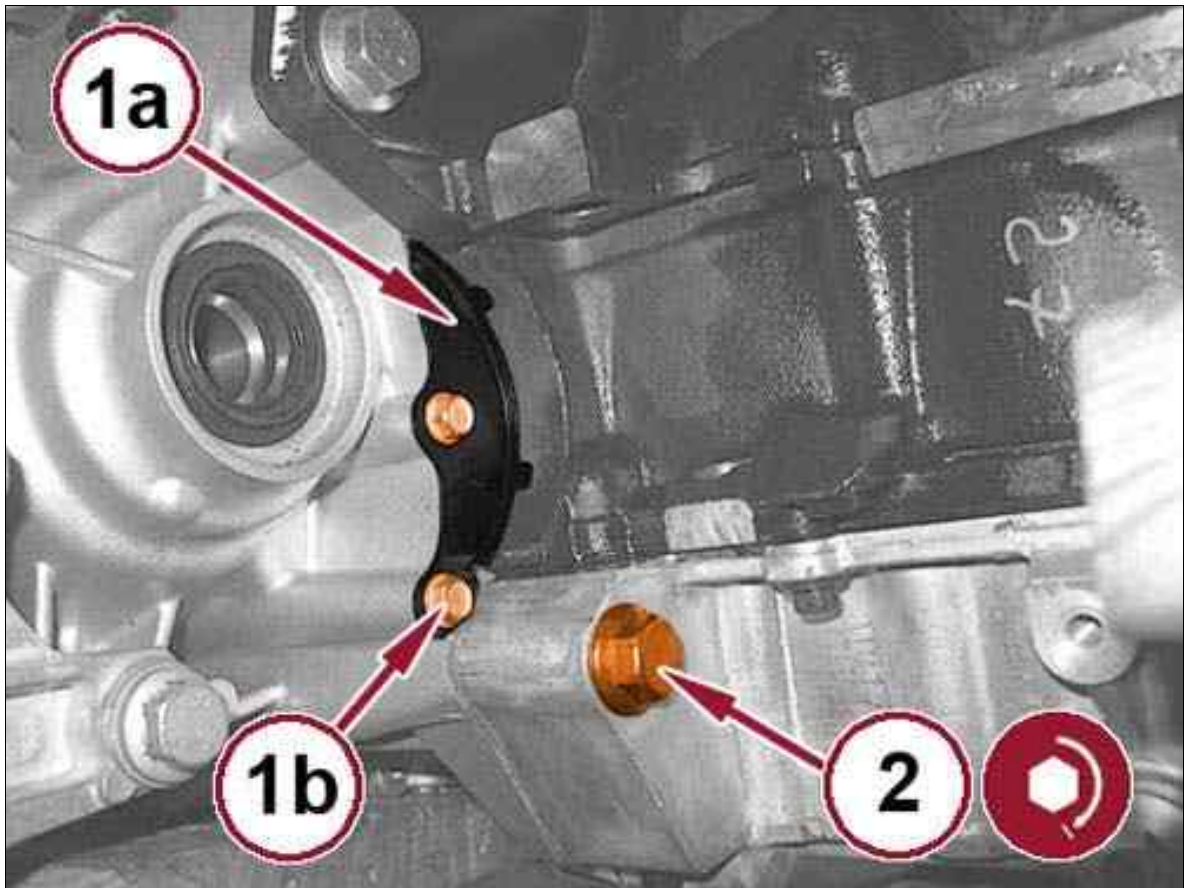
Gearbox To Engine Bolt & Flywheel Upper Guard
